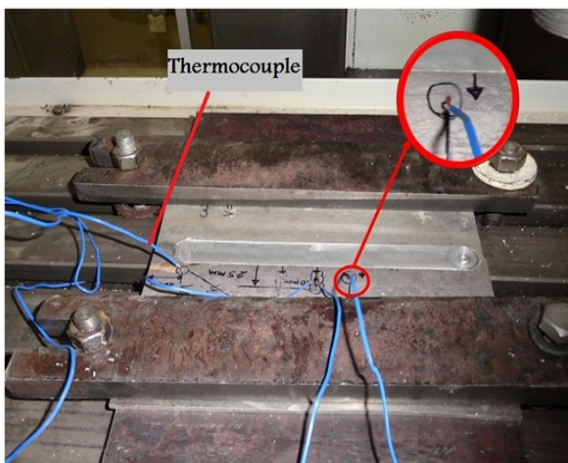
b :Thermocouples location embedded on aluminum workpiece.
